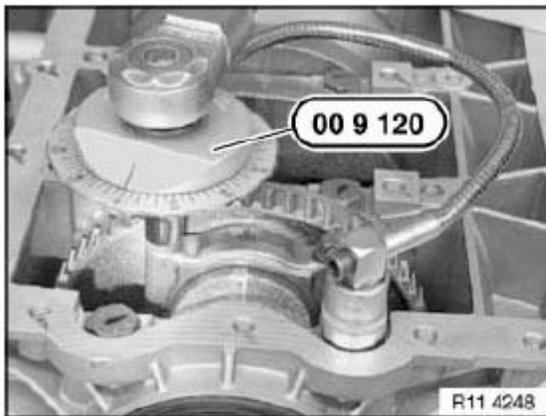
Adjusting Torsion Angle Of Connecting Rod Using Special Tool 00 9 120
